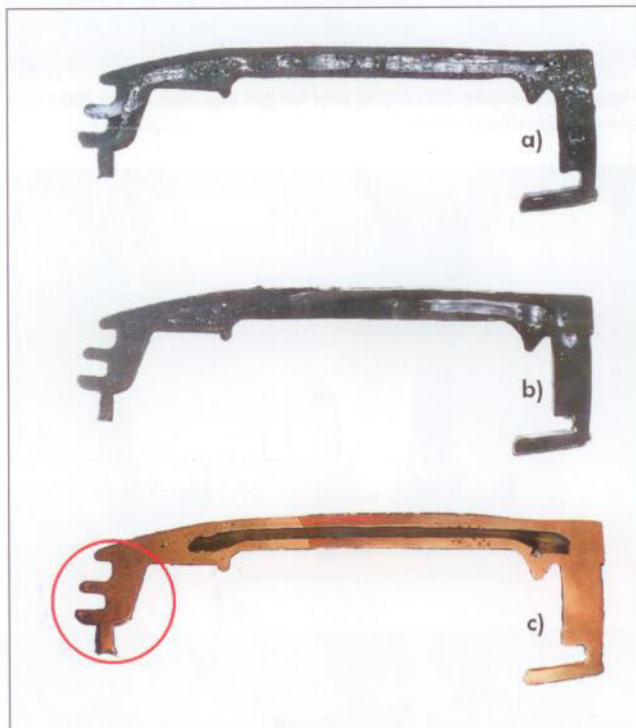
and c show defective castings from the first tests: If gas injection starts too late (Figure 15b), the melt has already solidified and the gas cavity cannot penetrate the casting. The same problem occurs when the die temperature is not high enough (Figure 15c) [7].
